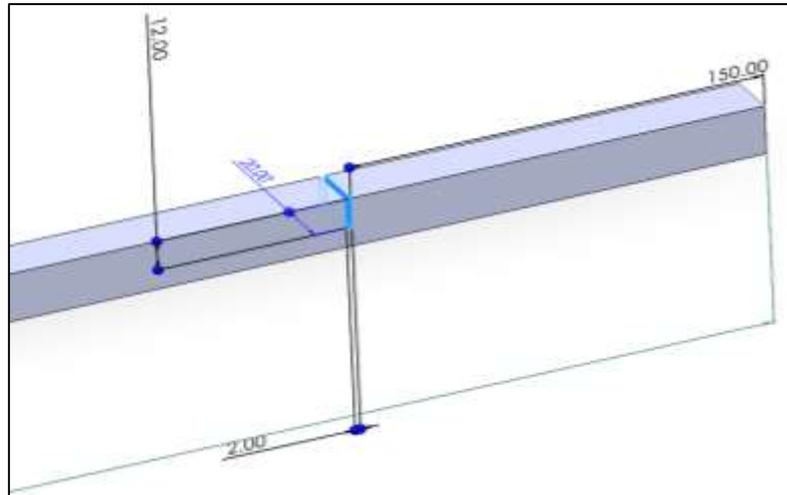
Zoomed image of the beam with crack at 150mm from fixed end
